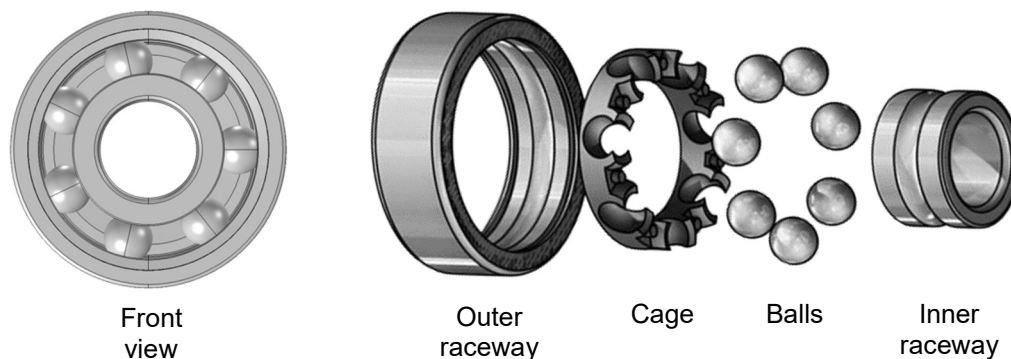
Schematic view of 608 bearing (left) and the exploded view (right) showing outer raceway, cage, balls and the inner raceway. CAD drawing (left) is obtained from SKF knowledge base.
